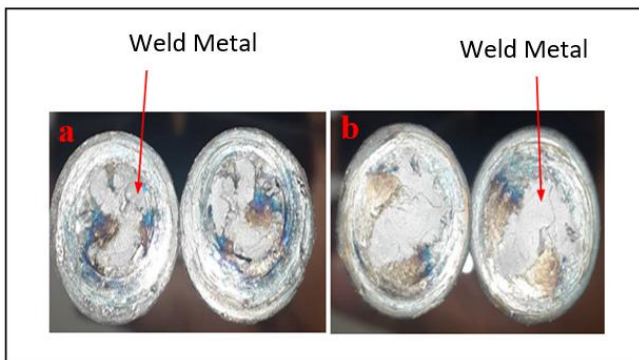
The Fracture Surfaces of weld joints, (a) UFW; (b) FW
